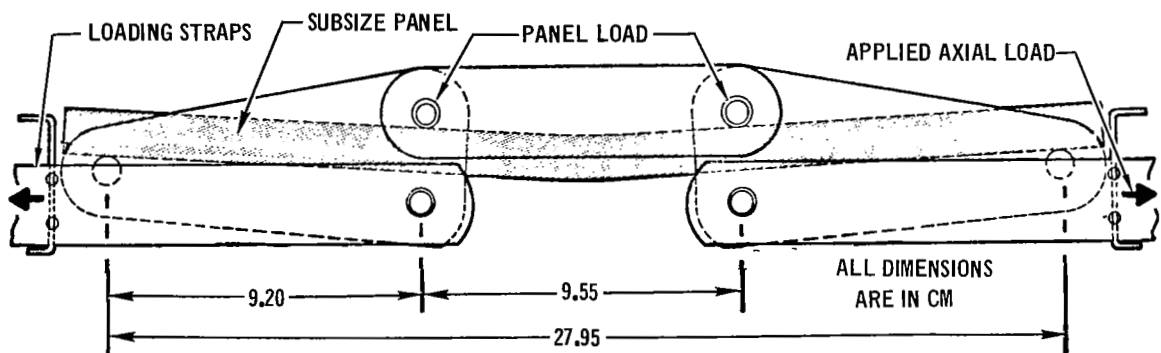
MECHANISM CONVERTS AXIAL LOAD TO PANEL BENDING LOAD
